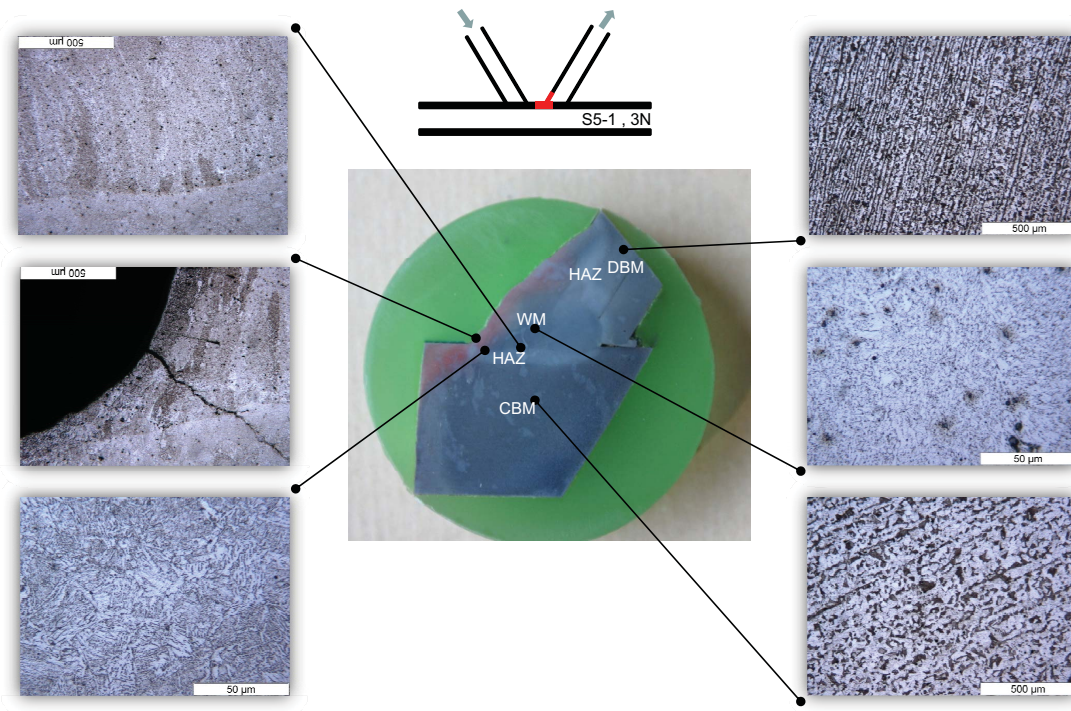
Cross-section photos after surface was treated with Nital. (CBM) Chord base metal; (HAZ) Heat affected zone; (WM) Welding material; (DBM) Diagonal base material.
